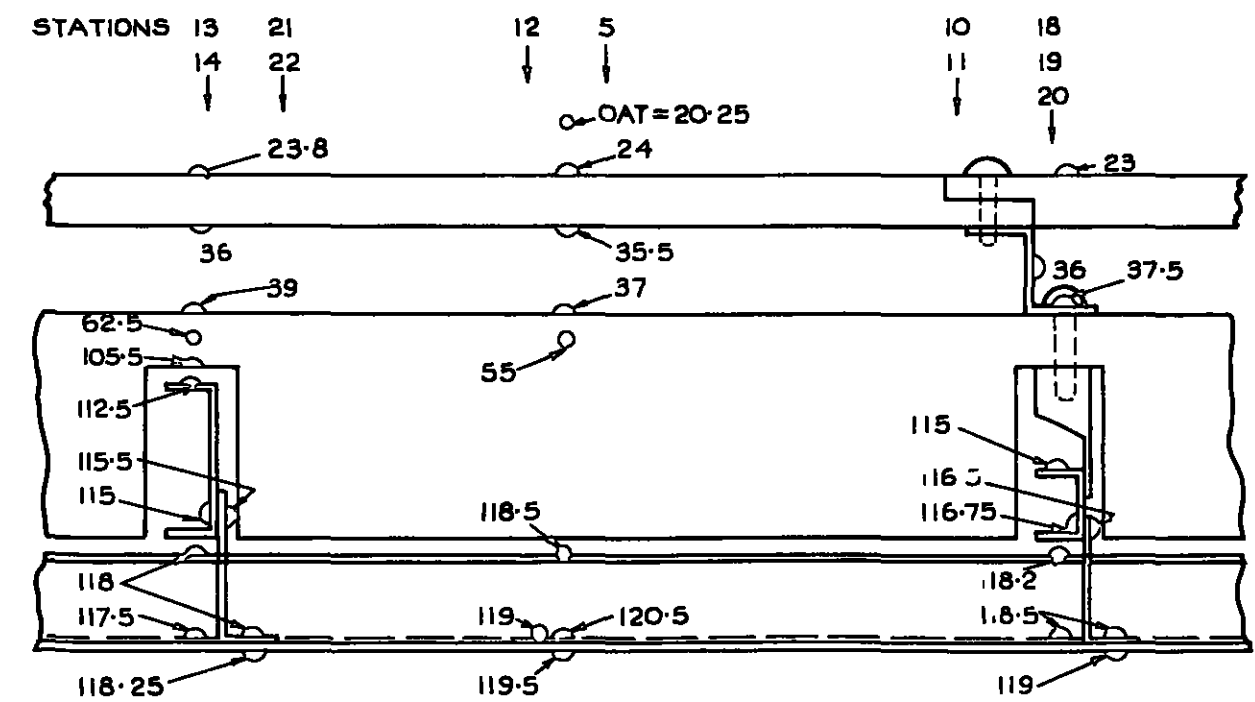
DETAILS OF CONSTRUCTION AND ATTACHMENT PANEL B198-6.
